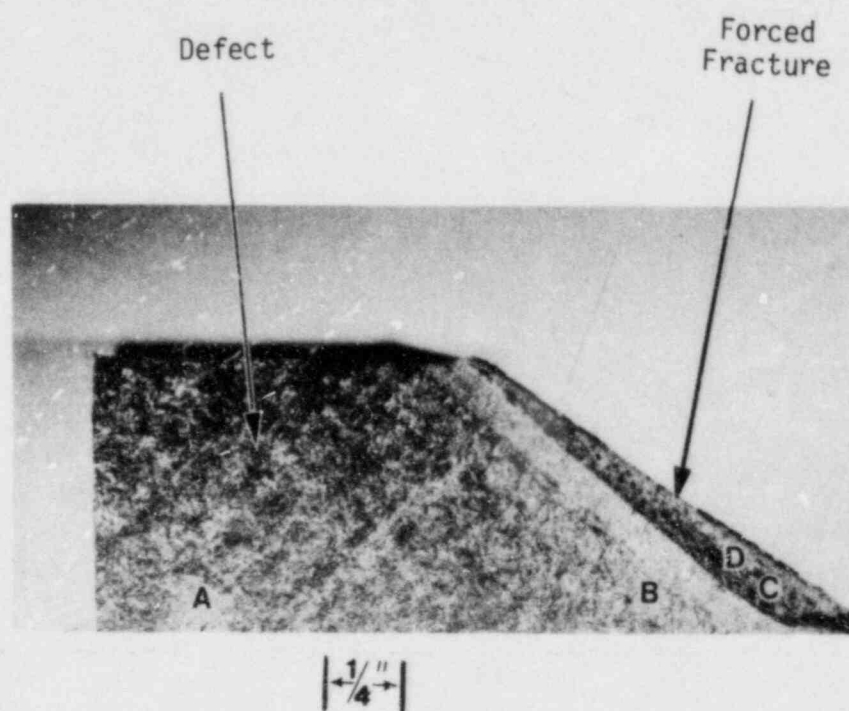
View of Fracture Surface on Specimen A1B Which Was Used for Auger Analysis
